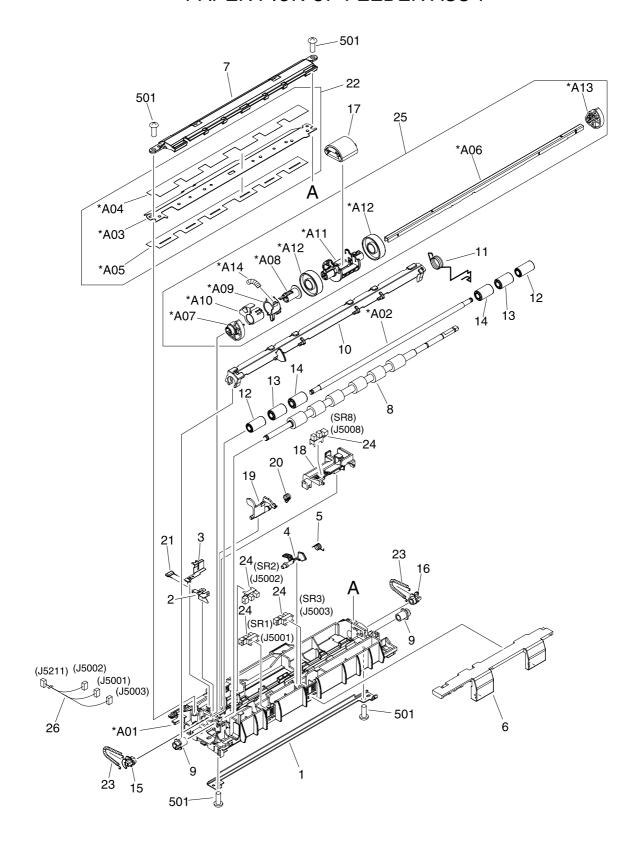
Paper pick-up feeder assembly for Tray 2
